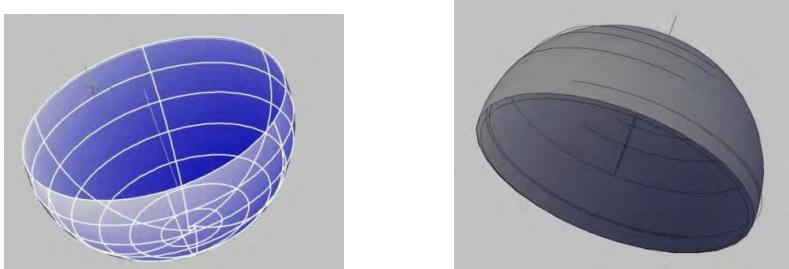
The measured socket and model of the socket, drawn with the CAD
